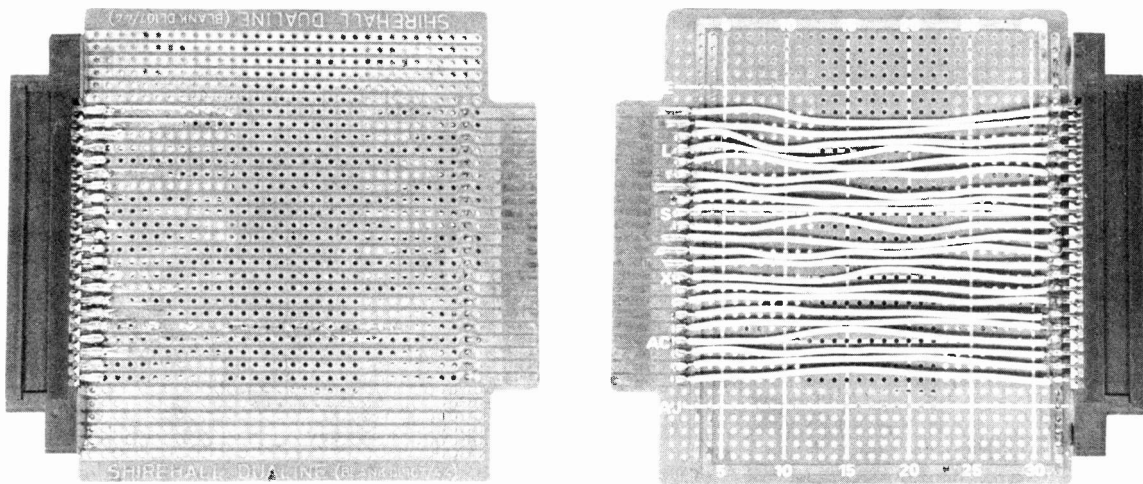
Construction of a 44-way extension board which makes possible testing of boards in situ
